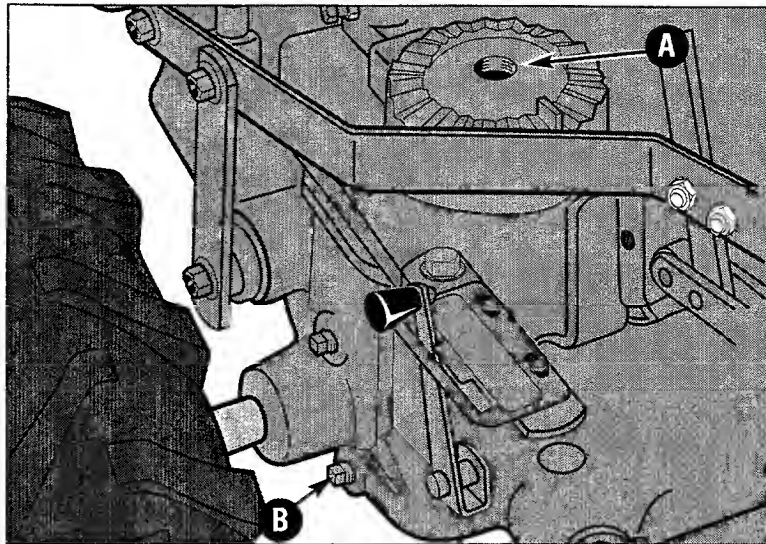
Gear oil fill hole (A) and gear oil drain location (B).
